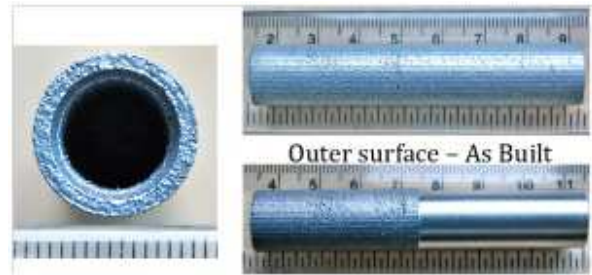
Annular wick heat pipe from AlSi12. Right top shows the outer surface of the pipe as built and right bottom after getting machined partially
